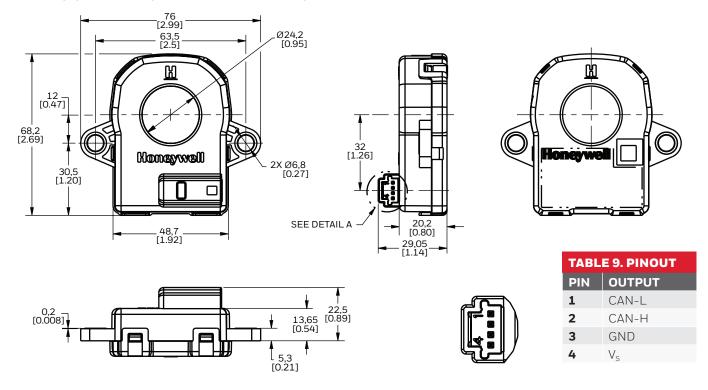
DIMENSIONAL DRAWINGS (FOR REFERENCE ONLY: MM/[IN])
